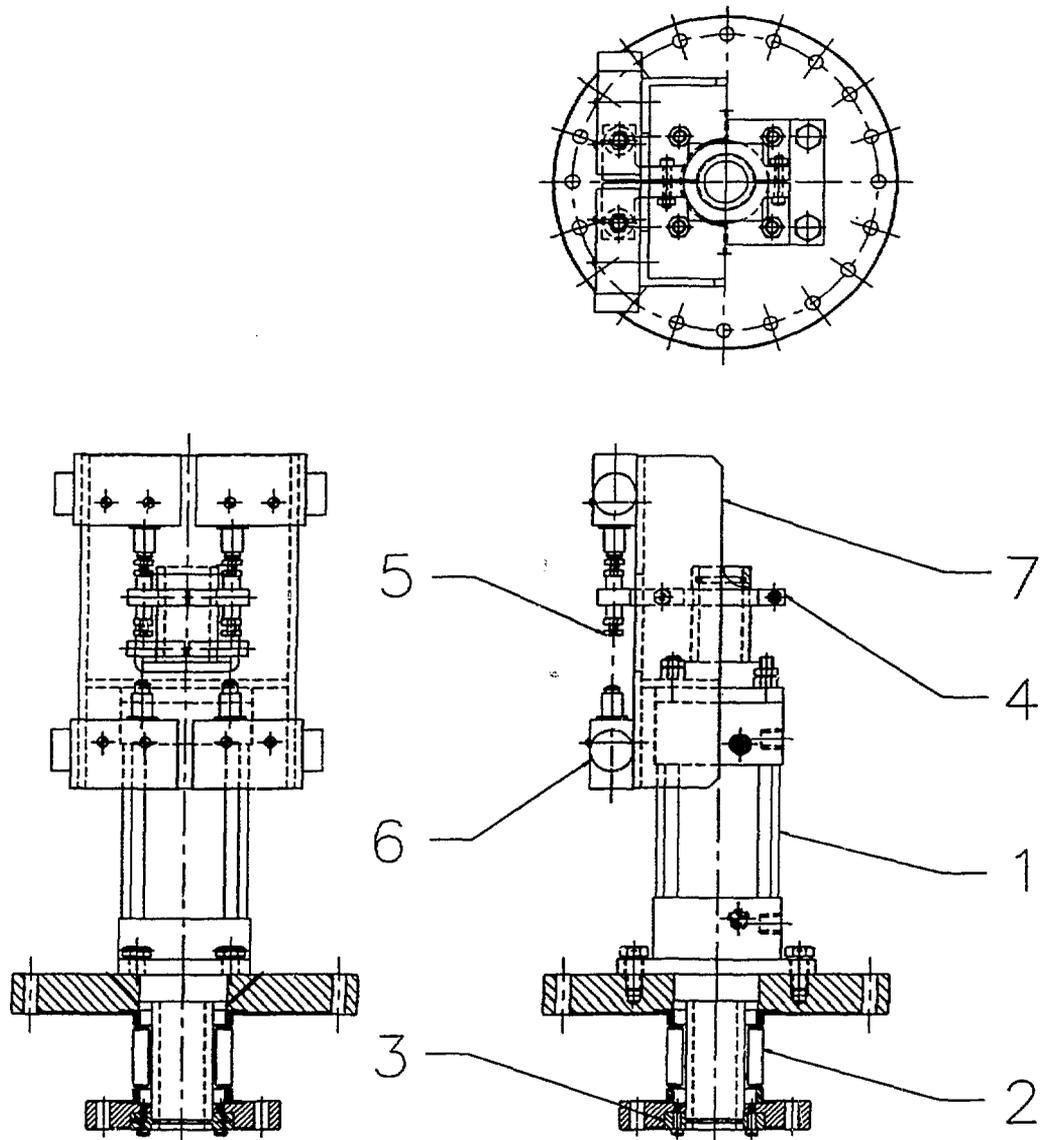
Actuator assembly of the APS BM front end photon shutter: (1) pneumatic actuator, (2) bellows and flanges weldment, (3) rod clamps, (4) switch position clamps, (5) adjusting Screw, (6) mechanical limit switch, (7) switch mounting bracket.
